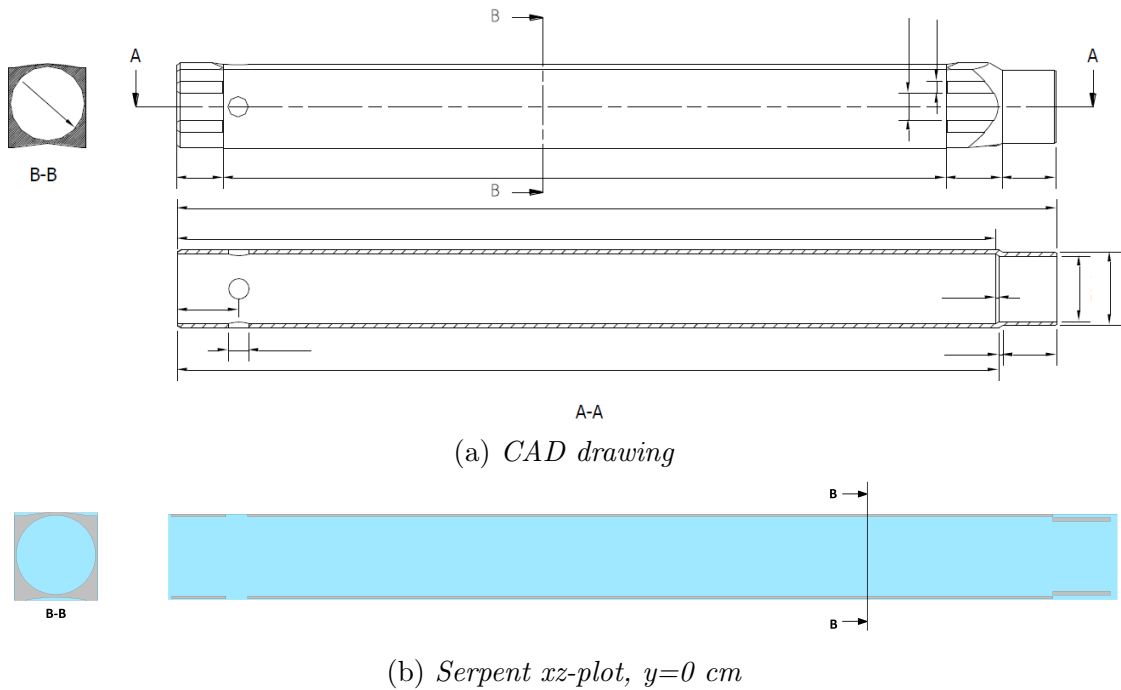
Aluminum assembly adapter CAD drawing from the specifications [1] (a) and modeled with Serpent (b).
